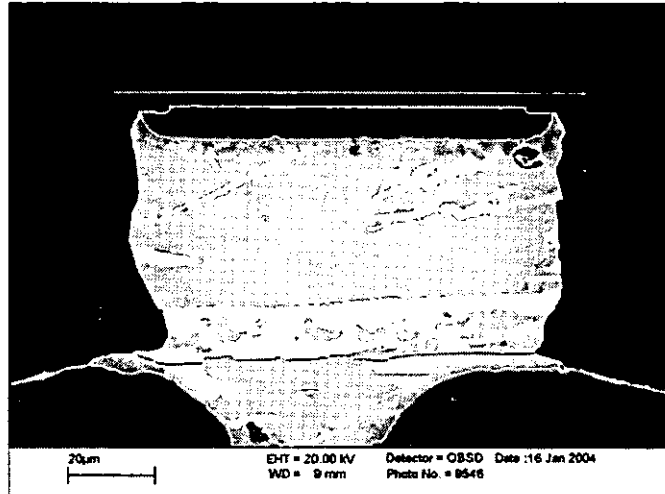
Sn-Ag-Cu solder joint formed on the pad with micro-via.
